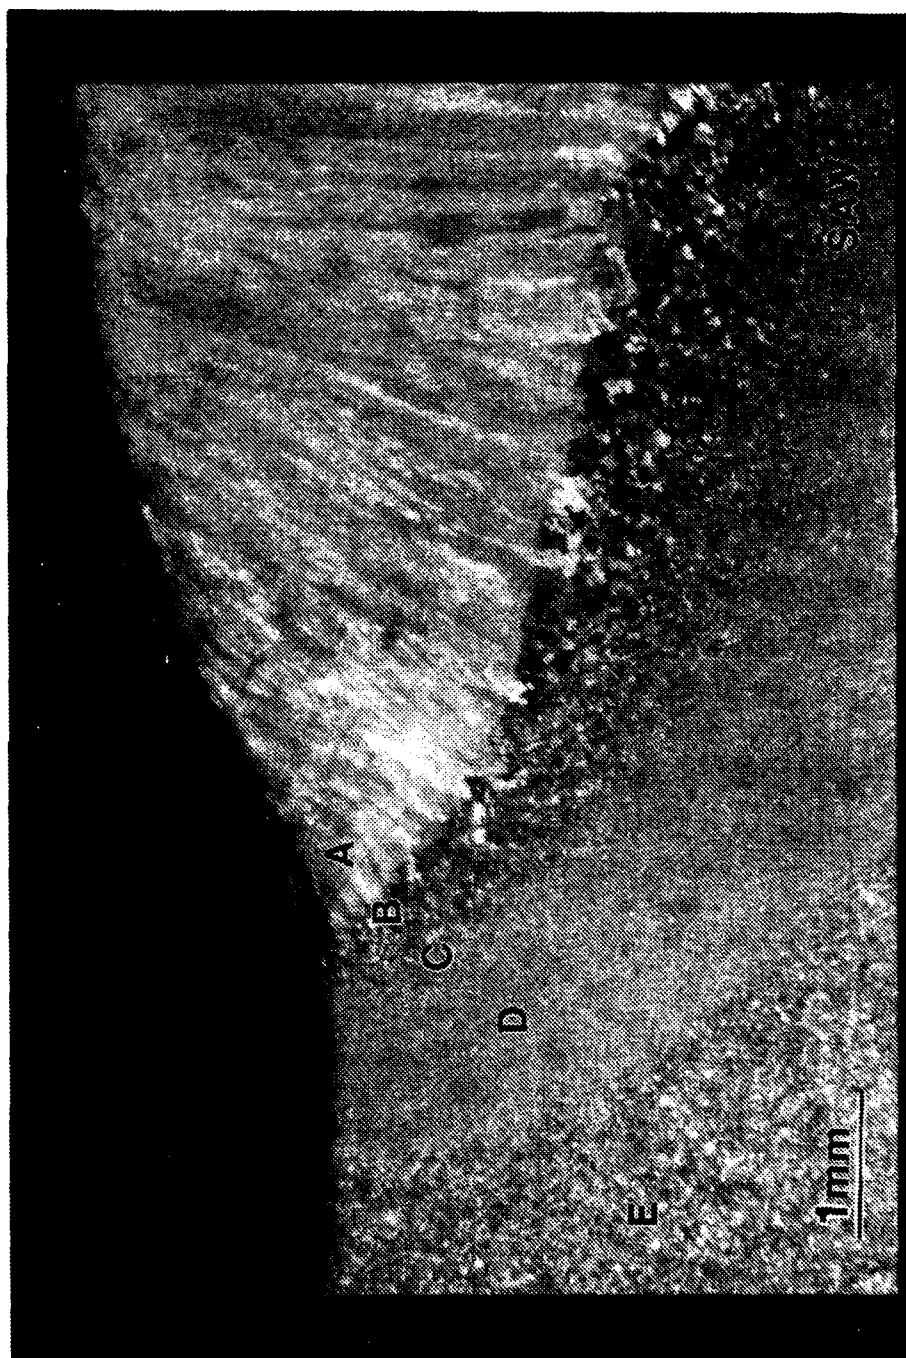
Montage Showing Welding Zones of SAW Weld Pass #36
